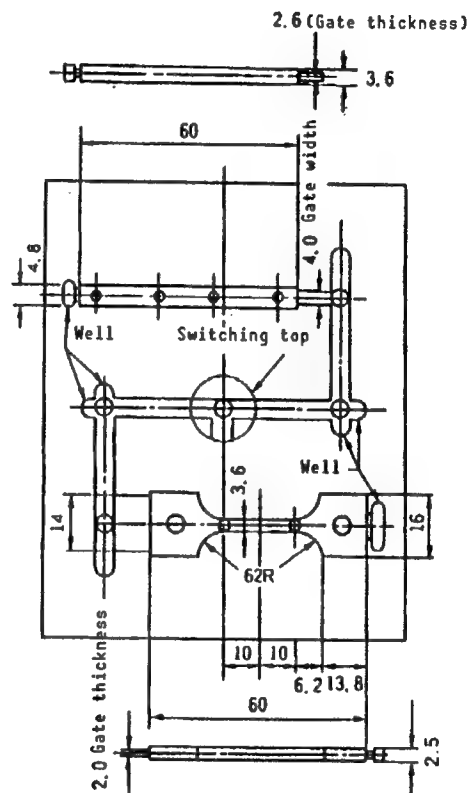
Dimensions of Die Cavities Used for Molding New Material Testpieces
